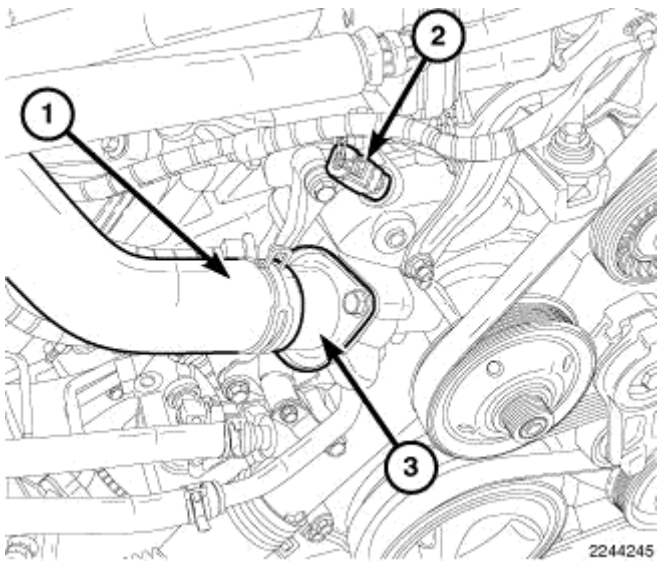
Identifying Engine Coolant Temperature Sensor & MAP Sensor (4.7L)
